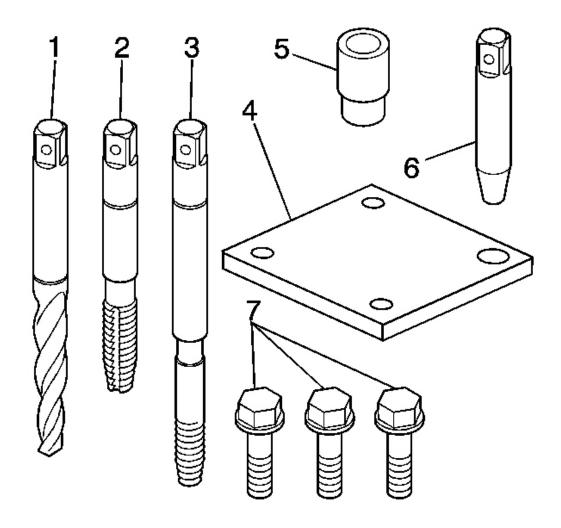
View Of Crankshaft Main Bearing Bolt Hole Required Tools Courtesy of GENERAL MOTORS CORP.
